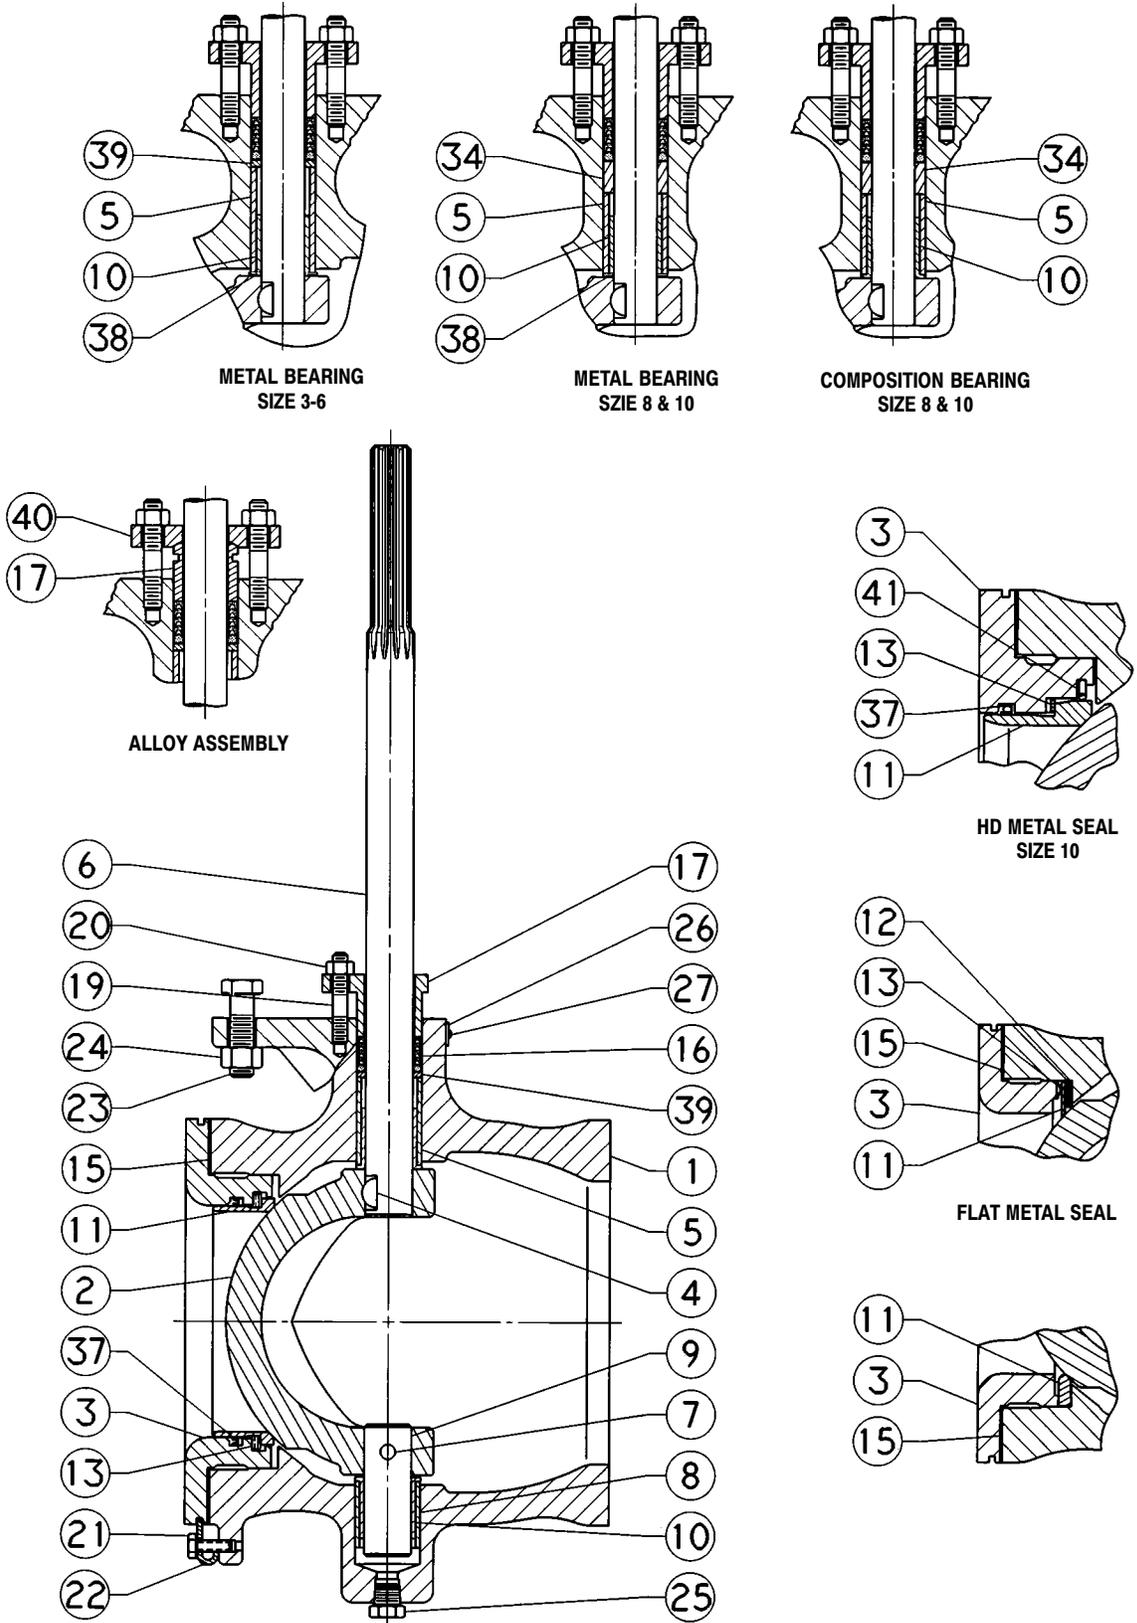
Designs V150 and V300 Valve Assembly (3-12 Inch Sizes)
